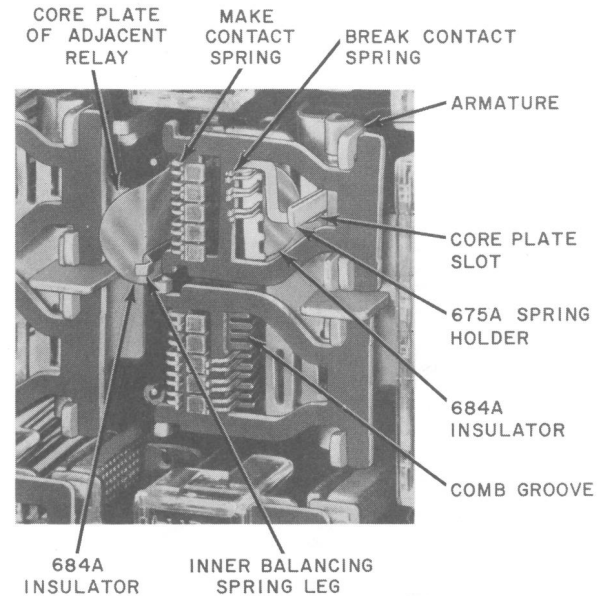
AM-Type Relay—684A Insulators and 675A Spring Holder Mounted on Upper Half of Relay
